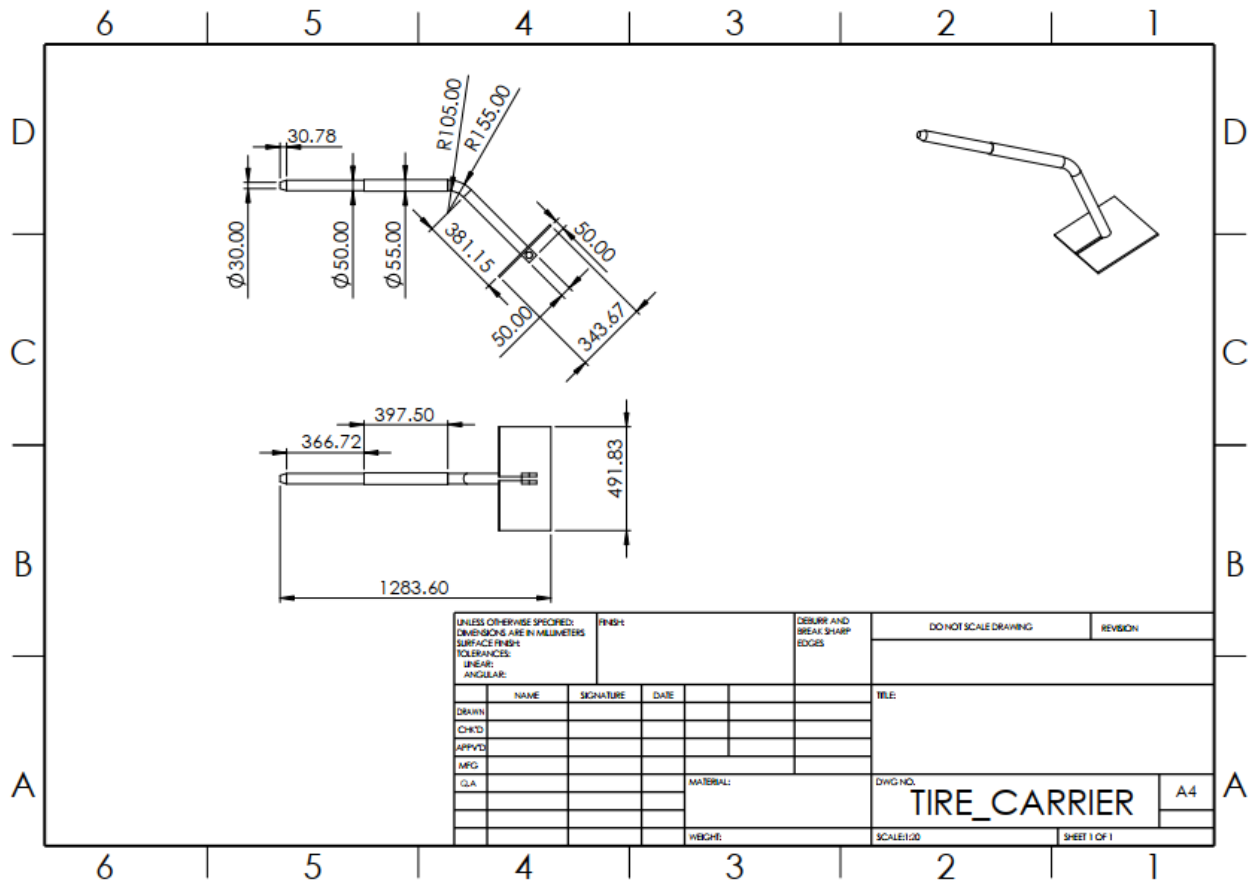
Geometry and Dimensions of the Tire Carrier
